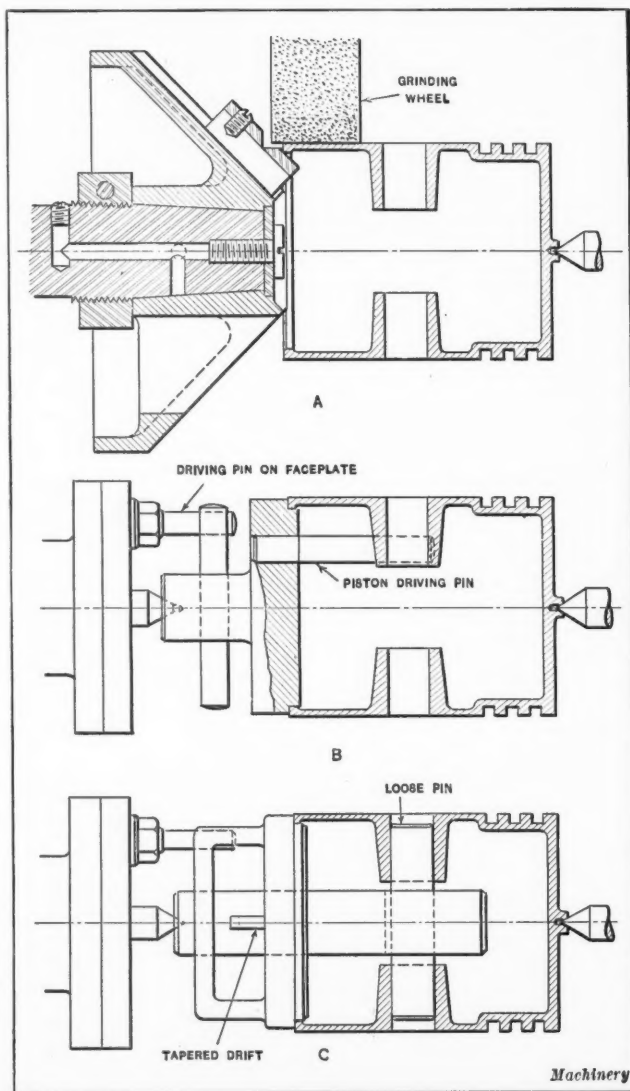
Three Types of Fixtures or Arbors for holding Pistons while grinding
